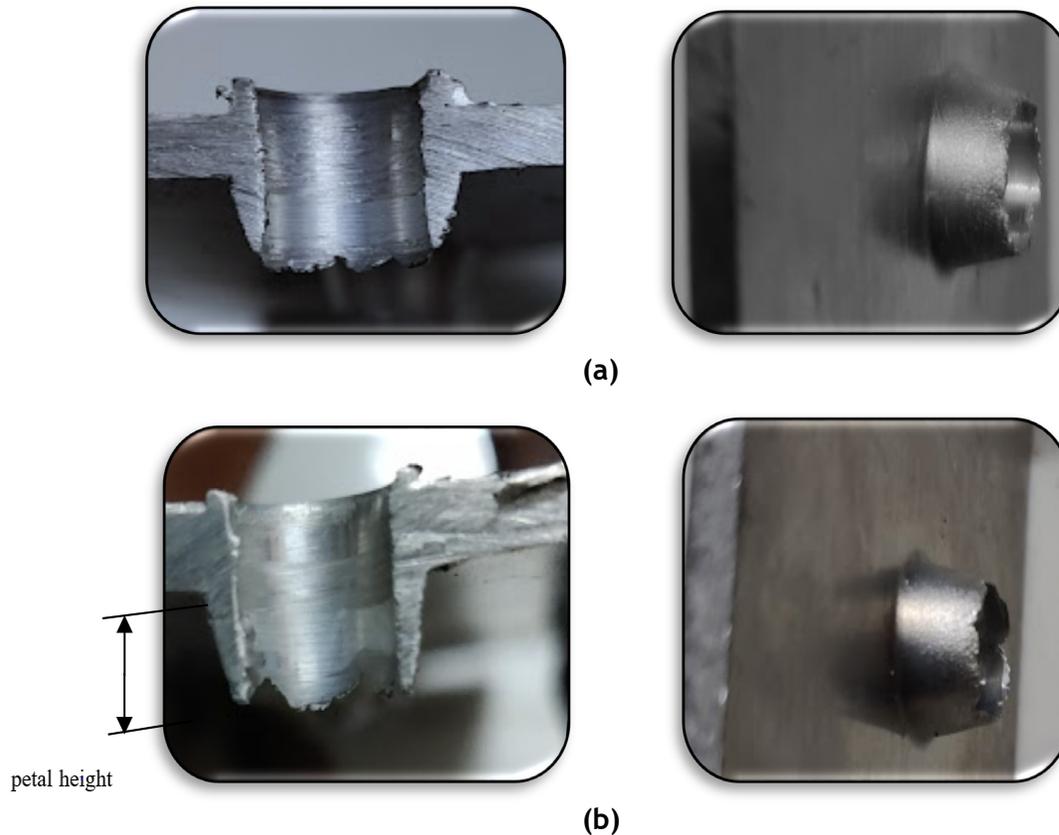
(a). Cross section view of friction drilling hole with WC tool. (b). Cross section view of friction drilling hole with HSS tool.
